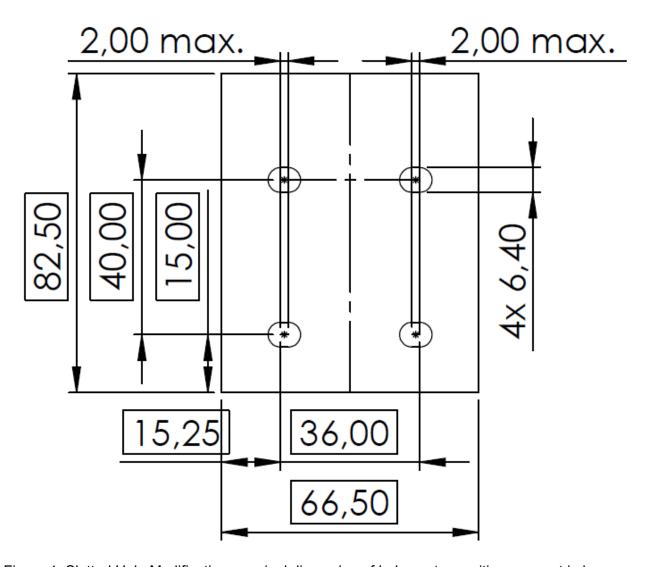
Slotted Hole Modification; nominal dimension of hole centre positions are put in boxes
